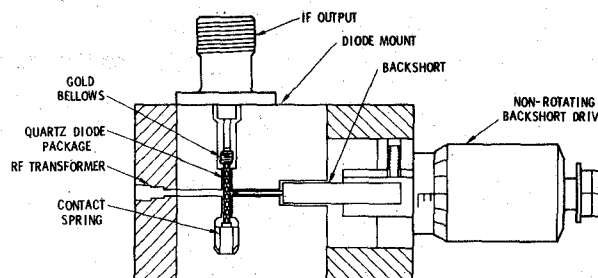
Cross-sectional view of the 92-GHz super-Schottky mixer mount used in these measurements. The input waveguide is WR-10 (0.100×0.050 in).
